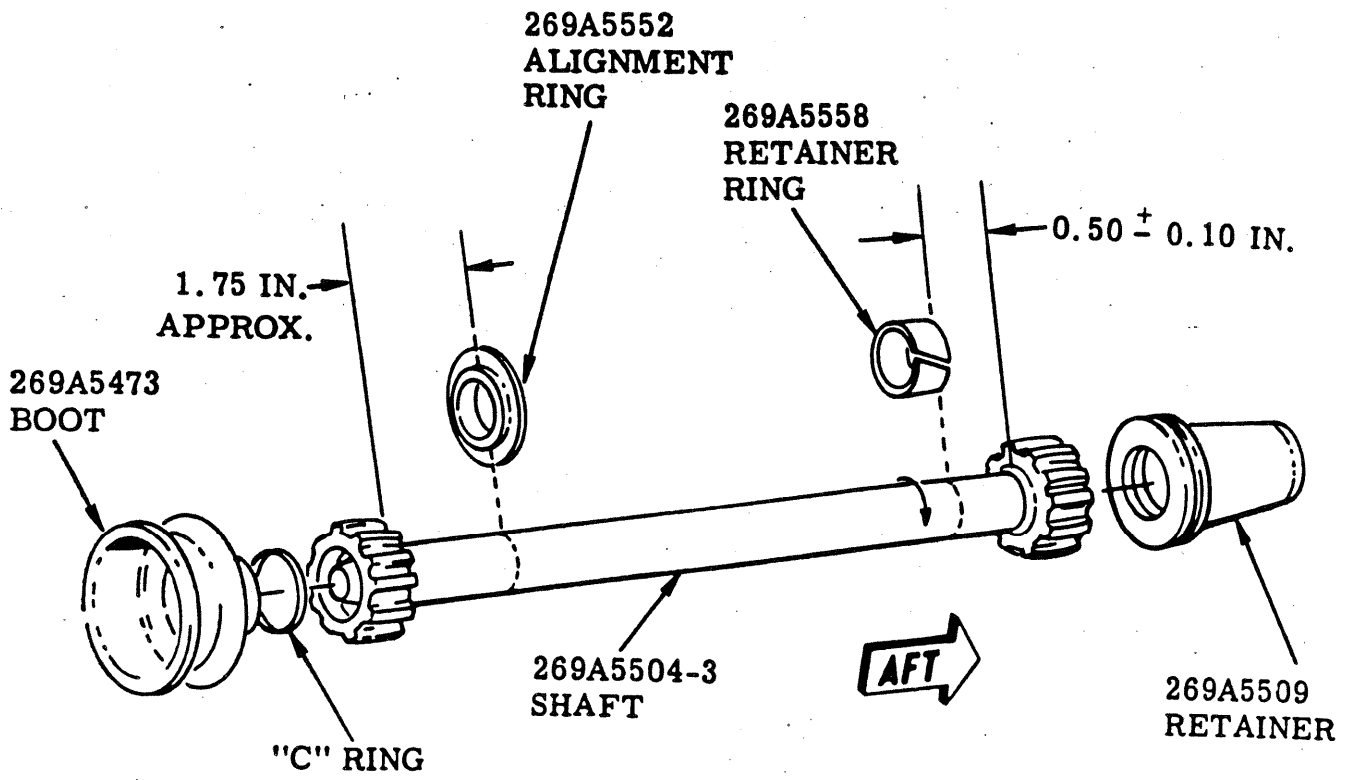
LOWER COUPLING DRIVE SHAFT ASSEMBLY.
